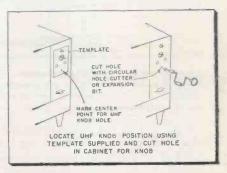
Front mounting template is marked to establish center point for UHF tuner knob. Hole is then enlarged, as shown.
